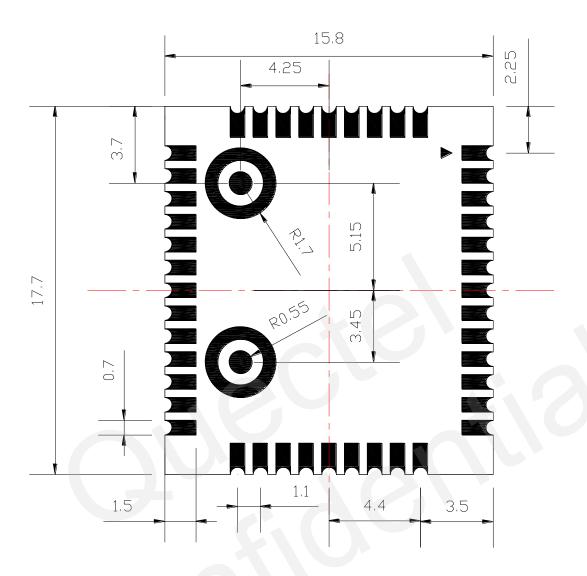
M66-OpenCPU Module Bottom Dimensions (Unit: mm)
